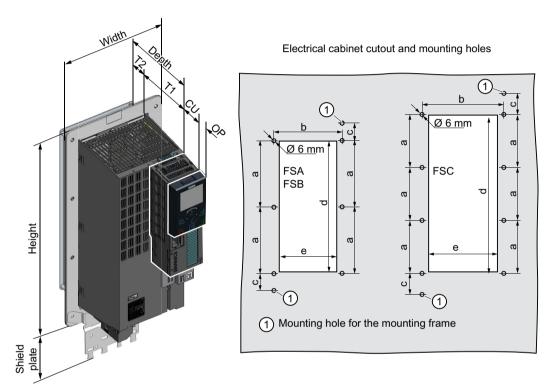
Dimension drawing and drilling dimensions for frame sizes FSA ... FSC
